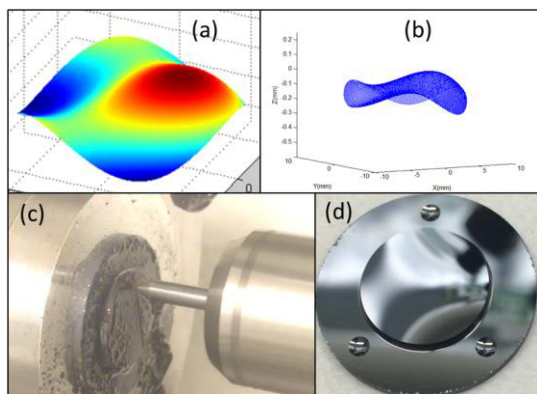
Ball milling process used to manufacture high-order Alvarez lens in IRG26 with alignment/metrology fiducials
